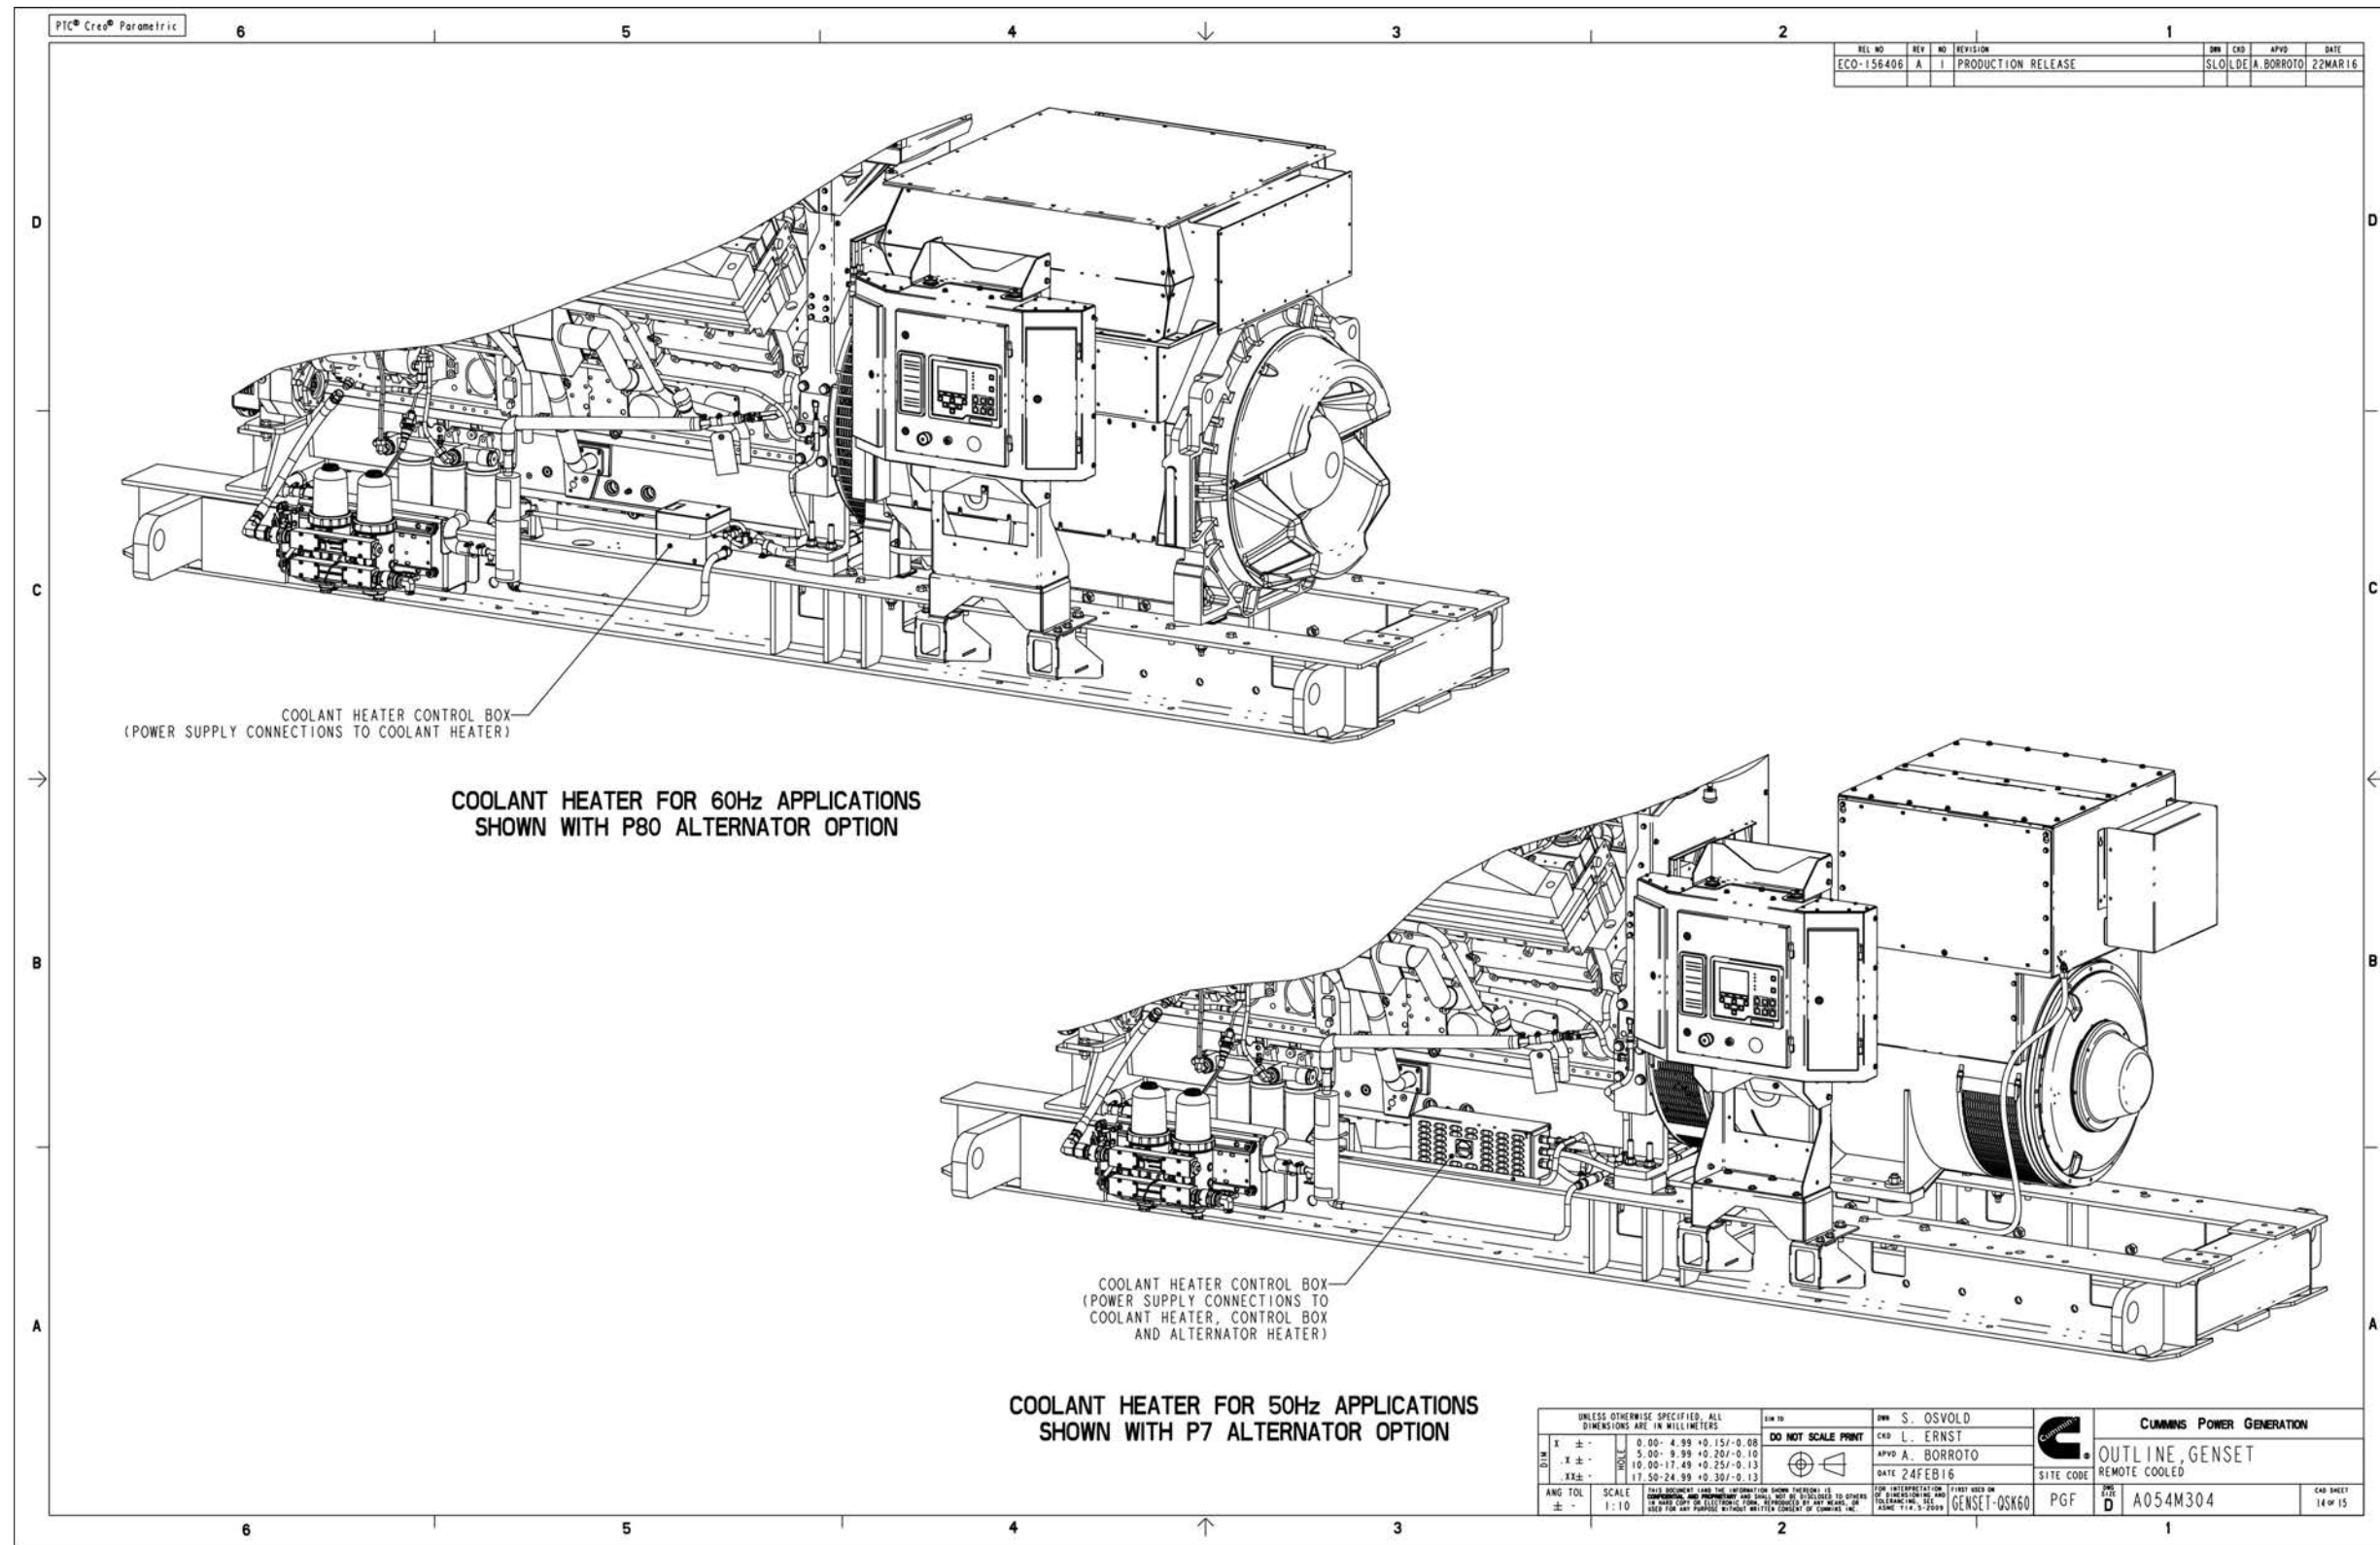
GENERATOR SET WITH REMOTE COOLING OUTLINE DRAWING (SHEET 14)
